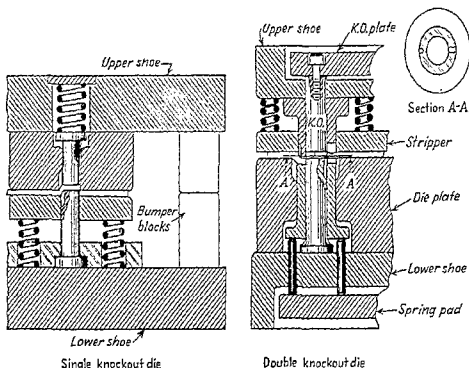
Single and double knockout dies. (General Electric Co.)
